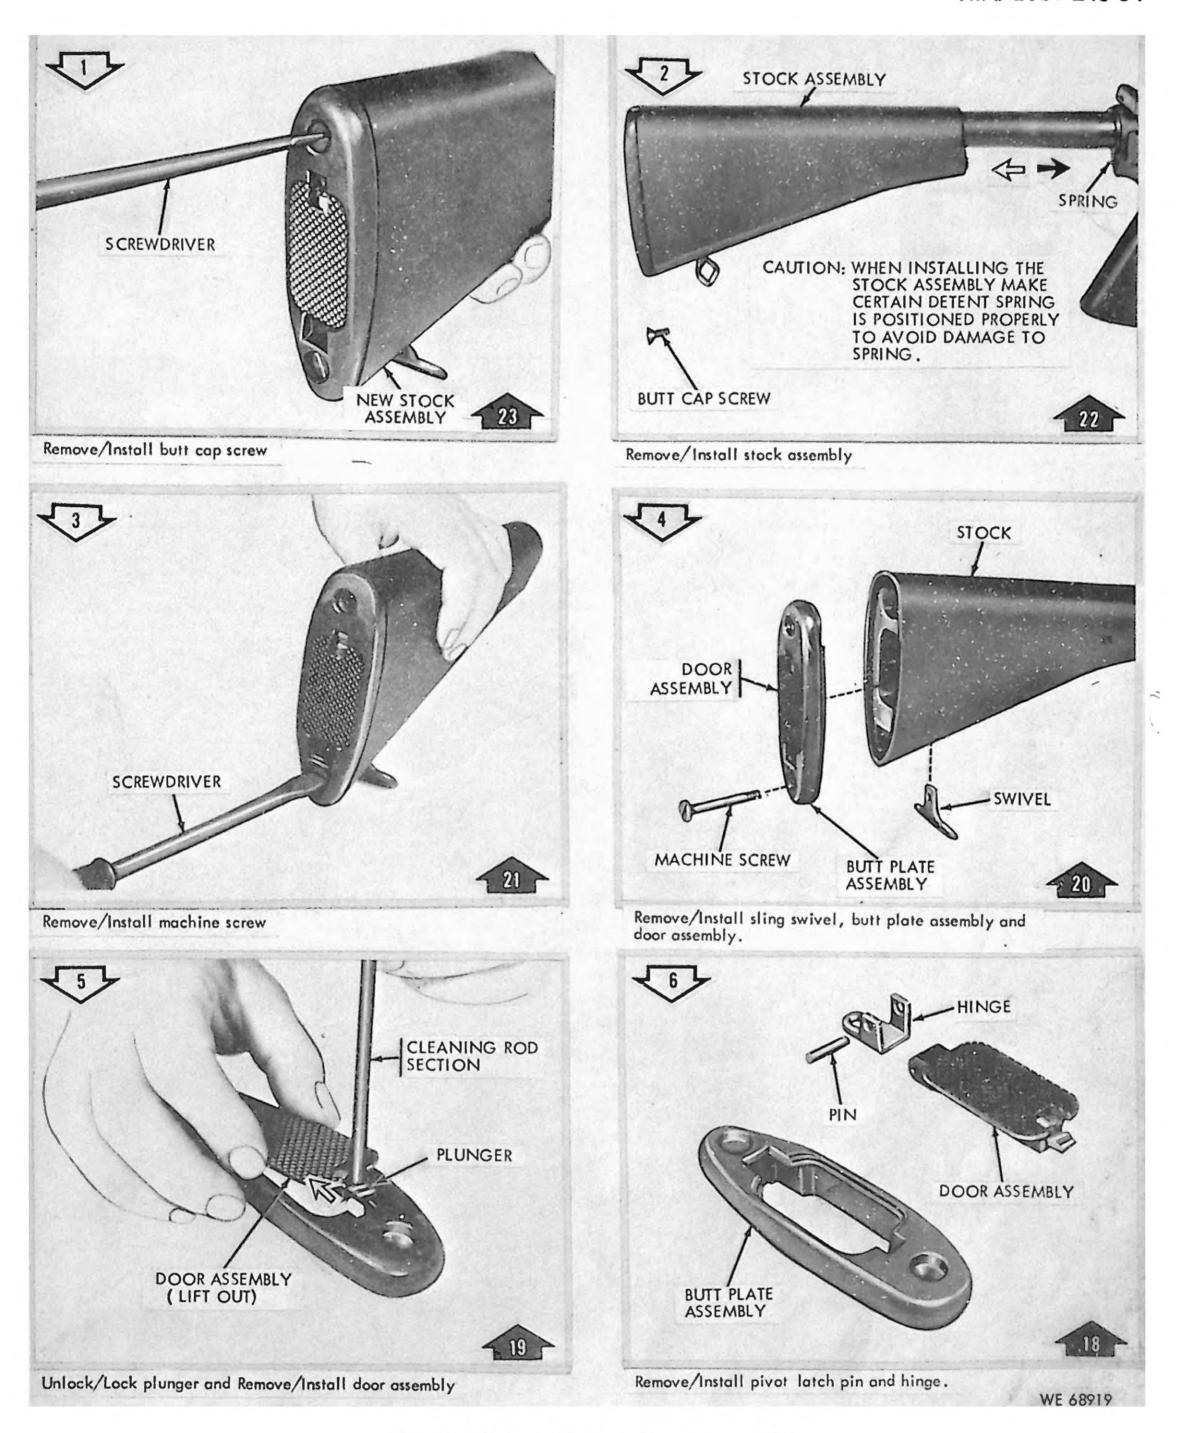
Disassembly/assembly of lower receiver group. (1 of 5)
